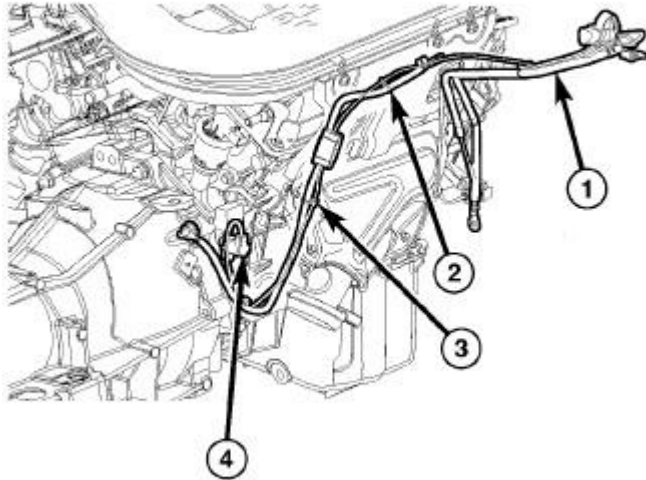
A/C Compressor Mounting Bolt & Transmission Cooling Lines
